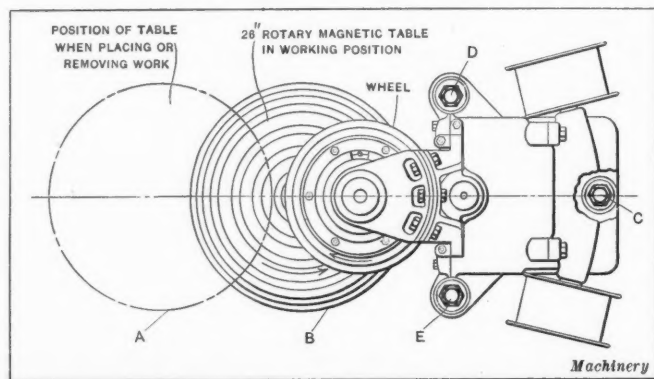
Diagram showing Working Position of Table on Blanchard Machine and Method of adjusting Vertical Column
